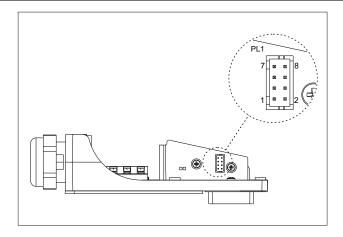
Sensor cable connection at PL1 on the Sensor PCB
